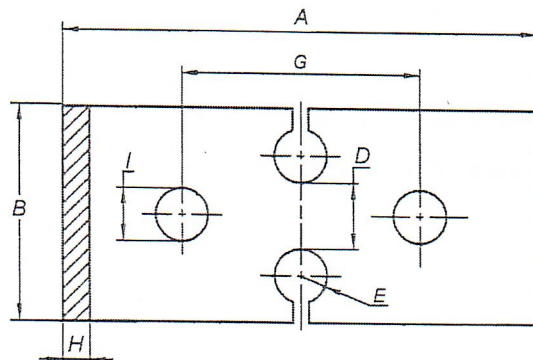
MACHINED TYPE A TENSILE TEST PIECE
